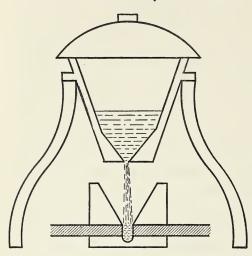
Thermite Crucible in Place to Weld Rail
